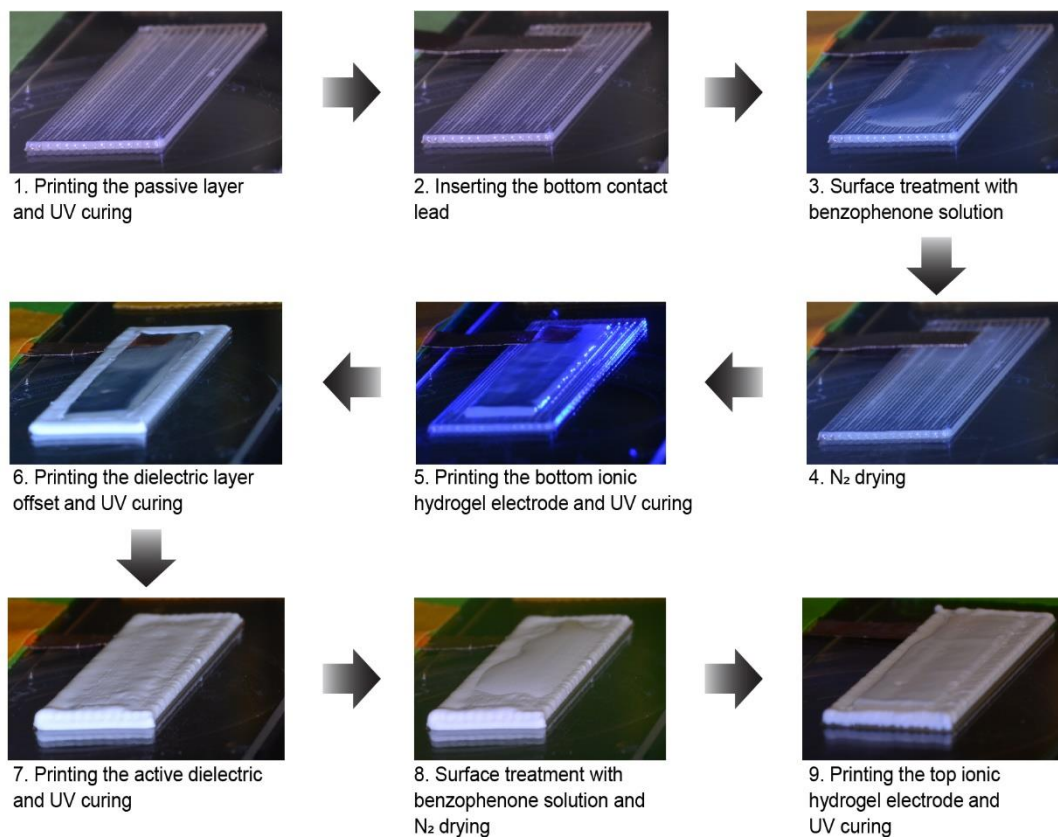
Step by step fabrication process and 3D printing of the unimorph DEA.
